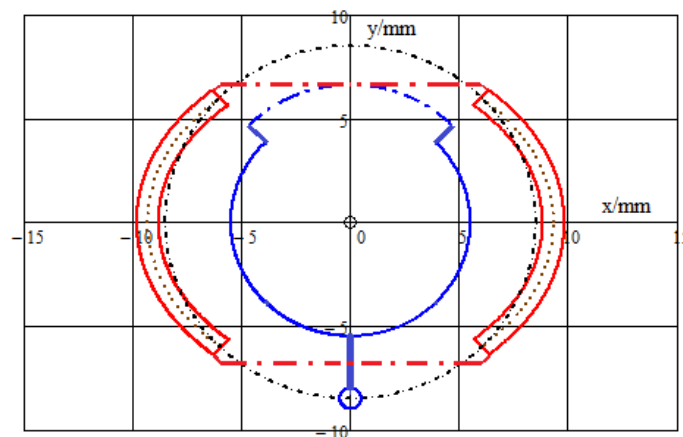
Grooved cam profiles and geared sector with double symmetrically rack
